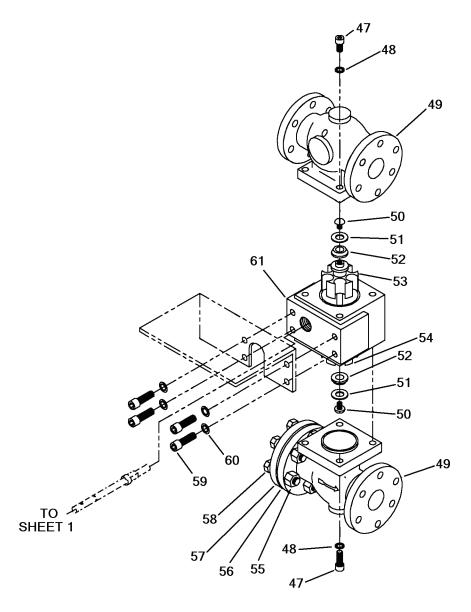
Diverter Valve (Sheet 1 of 2).
